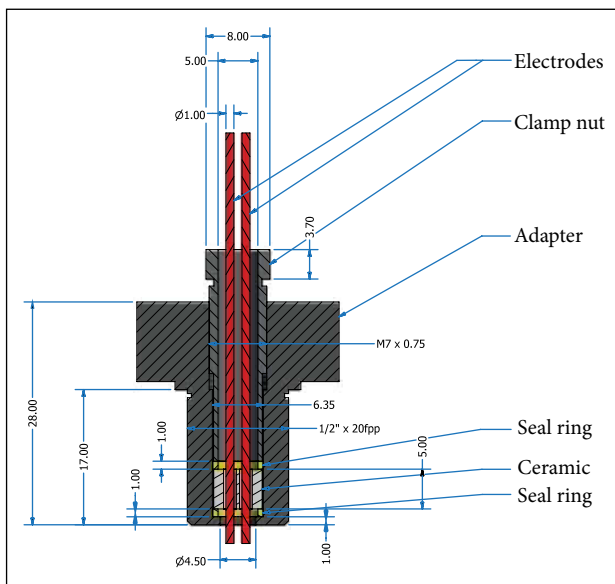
Sectional view of the developed ionization sensor [dimensions in mm].
